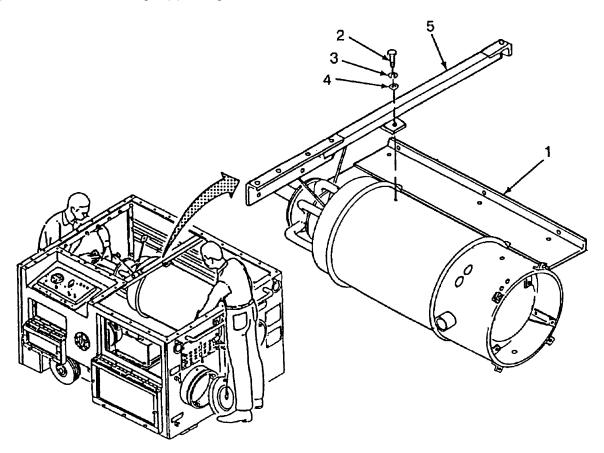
Heat Exchanger, (Model H120-1) Removal
